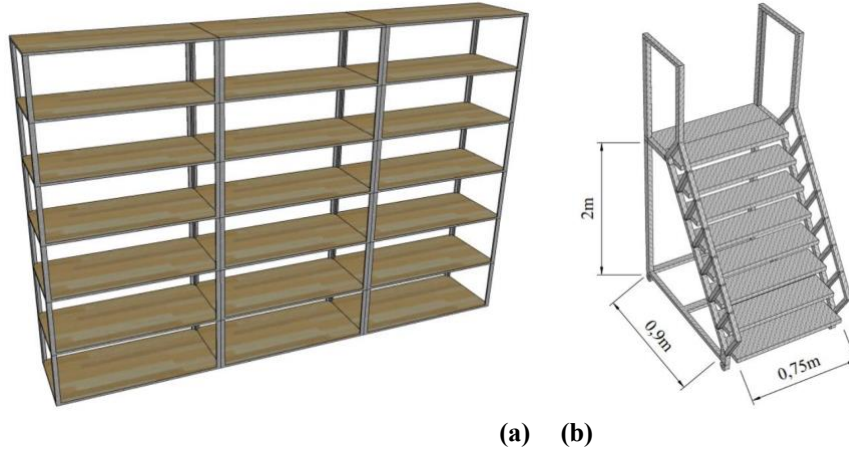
(a) Proposed Shelving System; (b) Rolling Ladder Design
